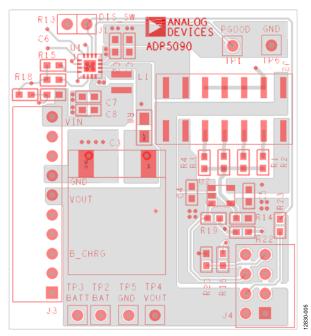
ADP5090-2-EVALZ Evaluation Board Top Assembly
